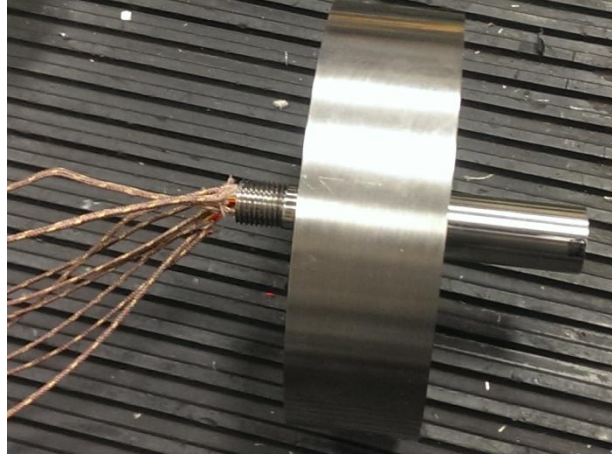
Thermocouple Probe with Duplex Insulated Wire
